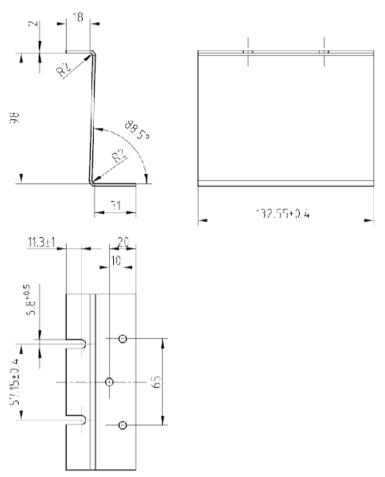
Side part of mounting support for X-300EEC (dimensions in mm)
